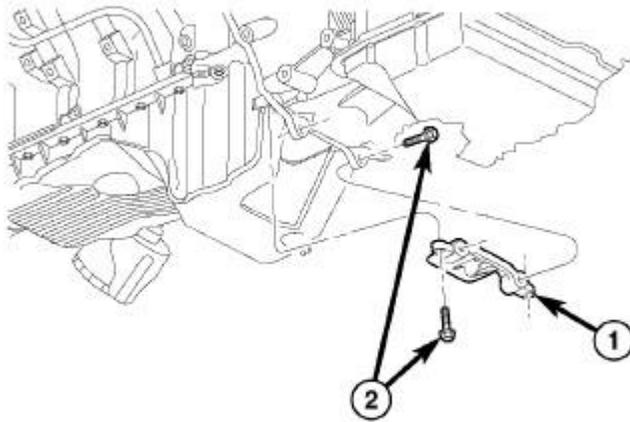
Transmission, Driveplate & Torque Converter Bolts
